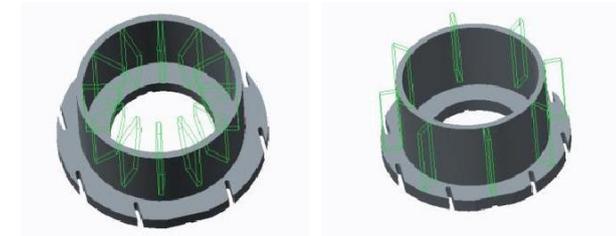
(a) Ribs position to be welded on the outside; (b) Ribs position to be welded on the inside
